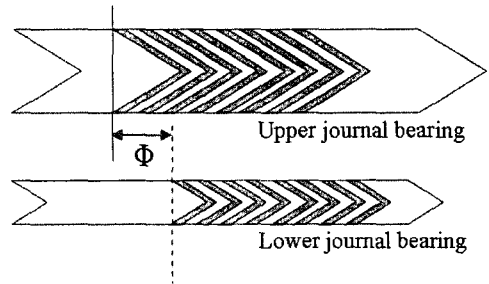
Phase shift between the grooves of upper and lower journal bearings
